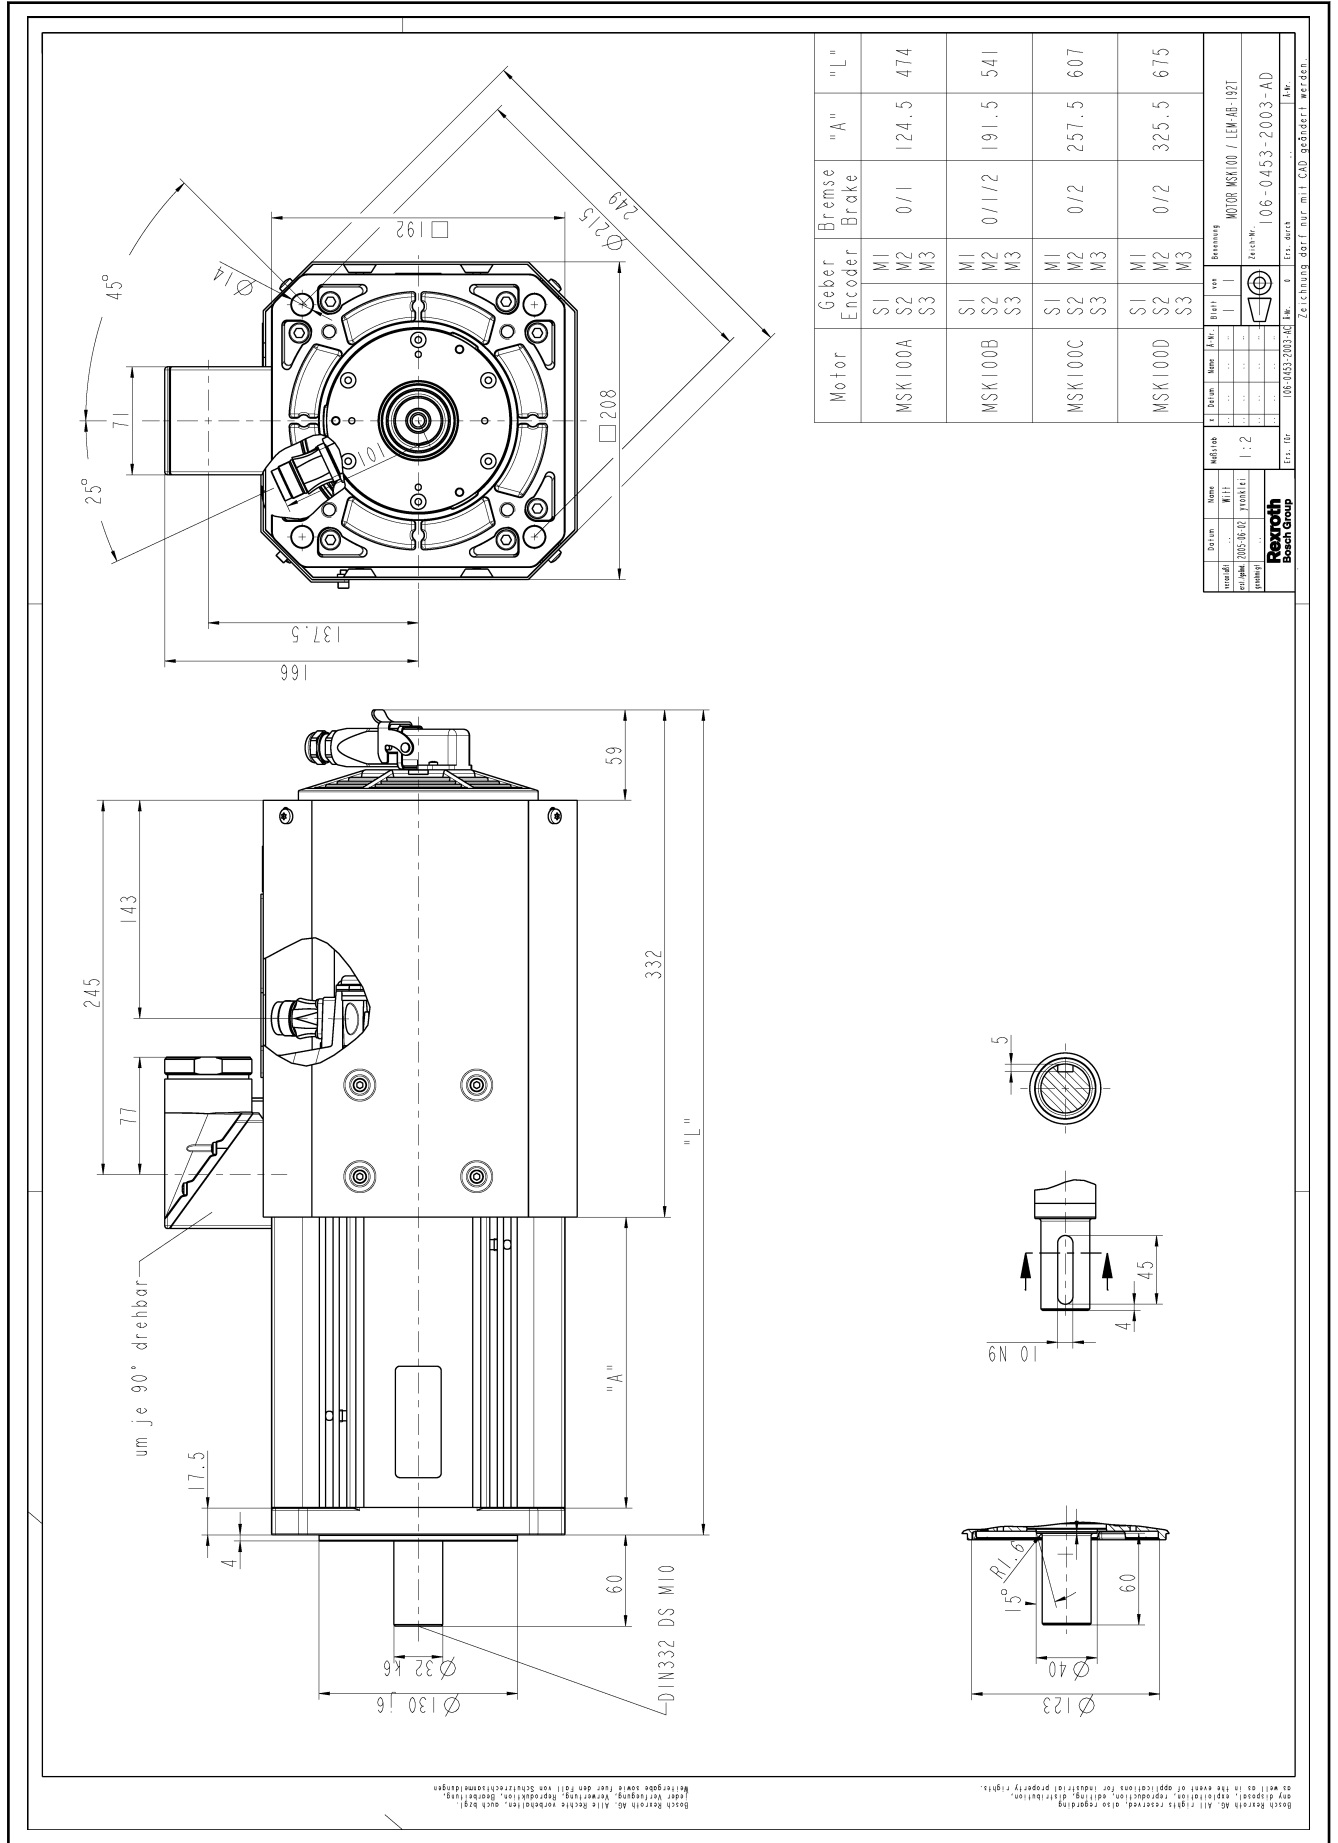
Dimension sheet MSK100 with axial fan unit
